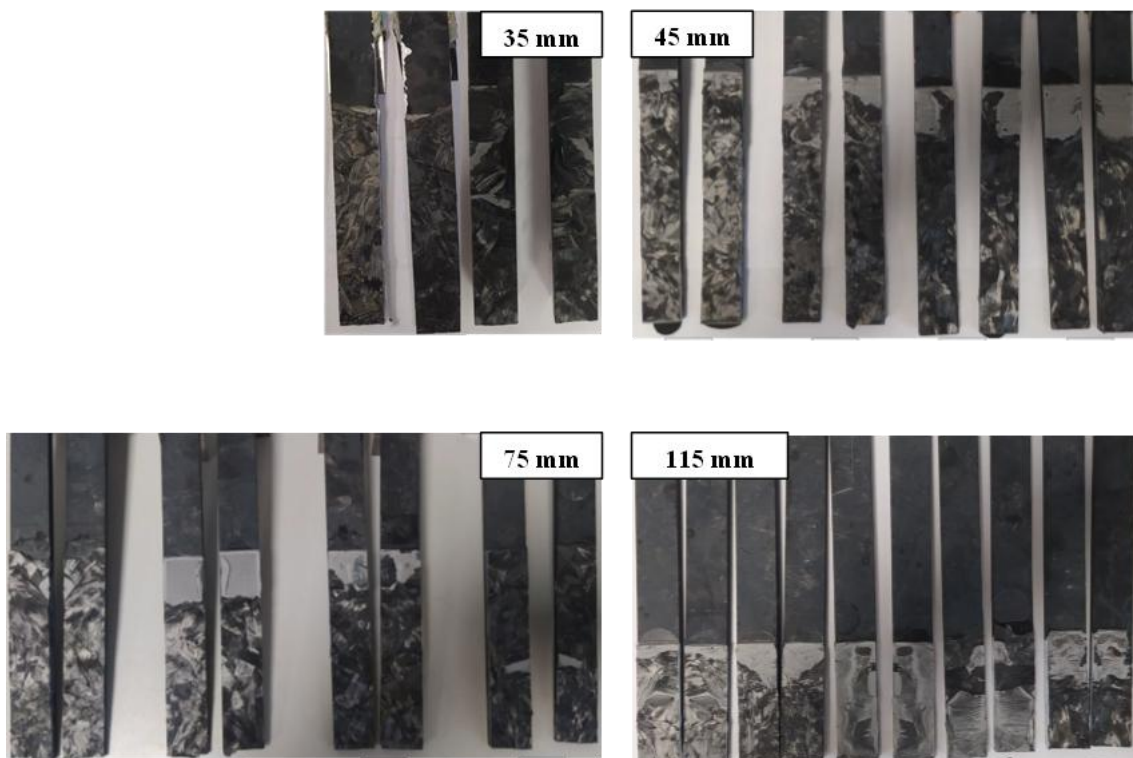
Fracture surfaces of DCB sandblasted specimens depending on initial crack length
